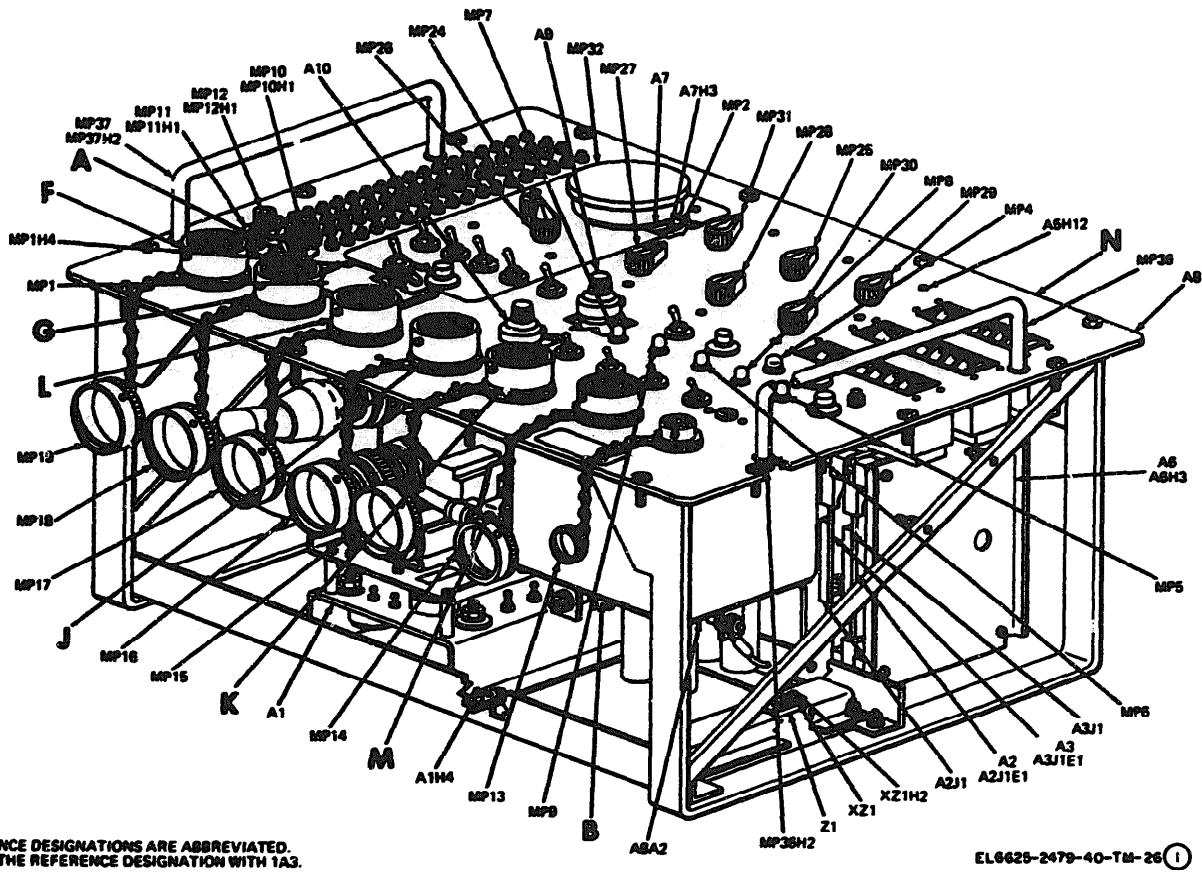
②. Case assembly 1A1, parts location (part 2 of 2).
